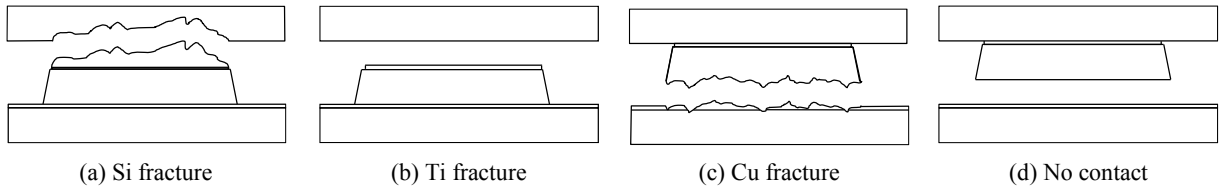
Types of fracture surfaces in schematically presented cross-sections
